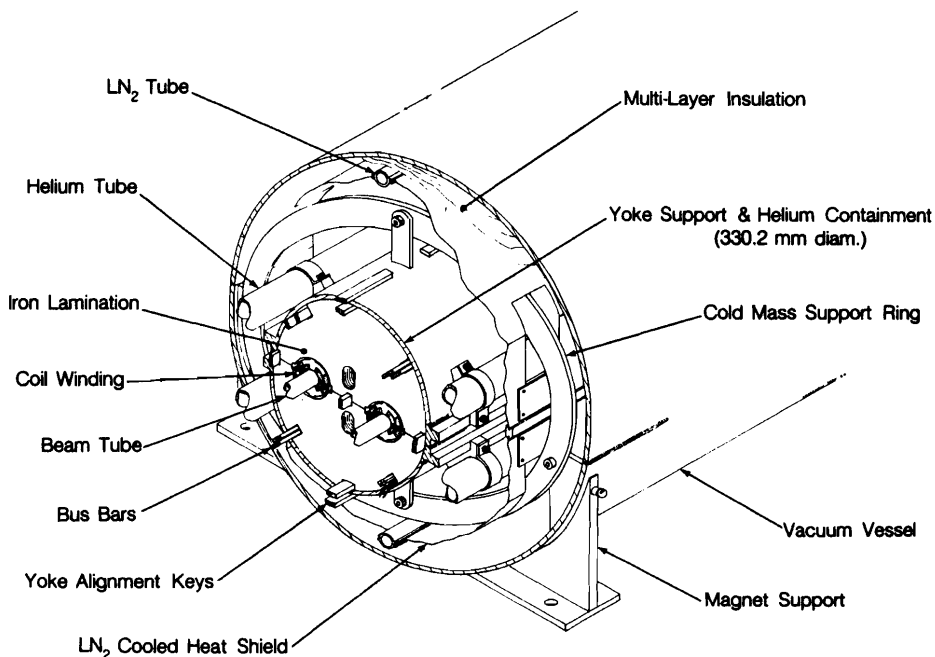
Cutaway perspective view of the 6.5 T, 2-in-1 SSC dipole magnet.
